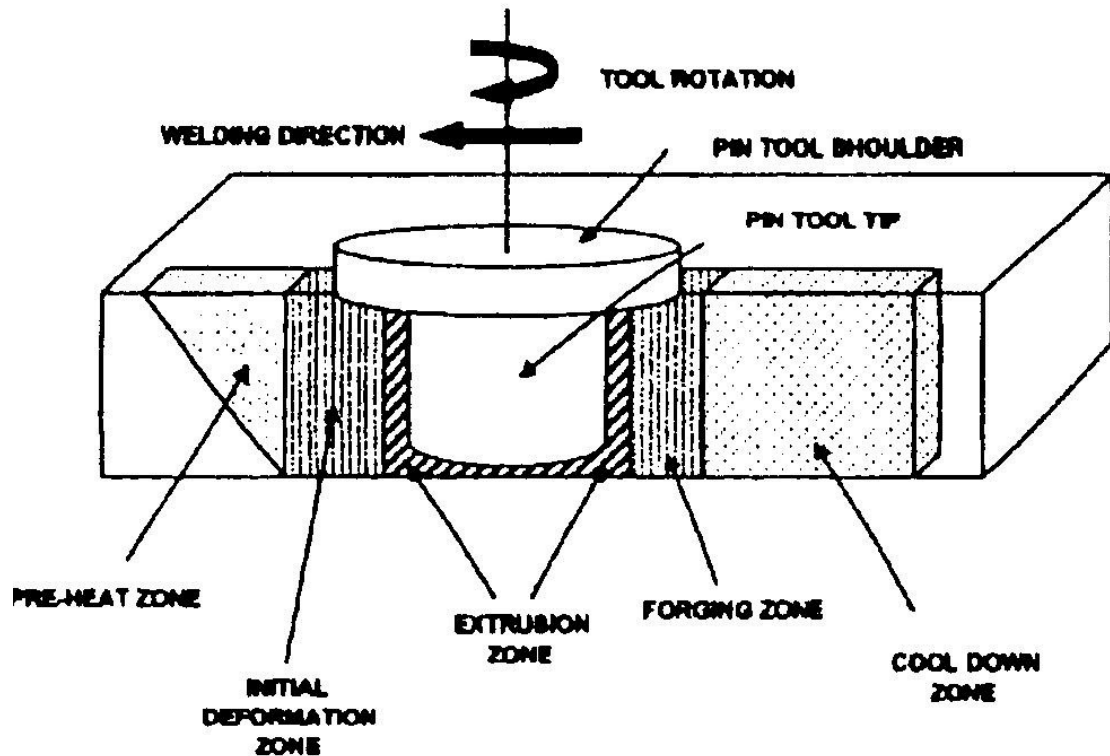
19: Metallurgical Processing Zones Developed During Friction Stir Joining.
